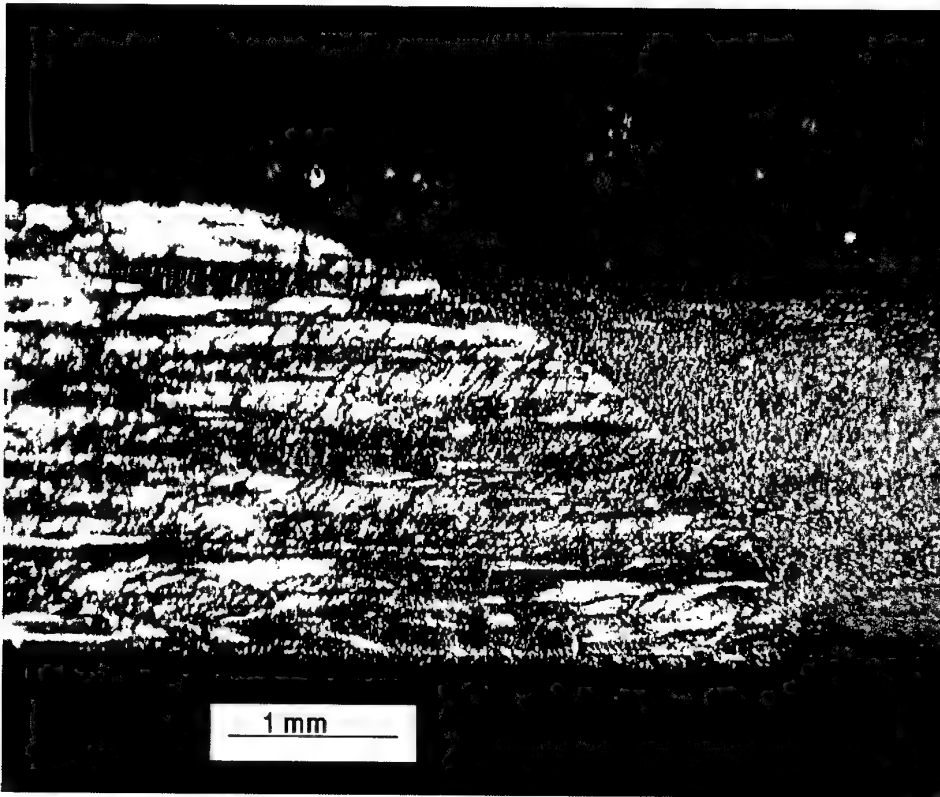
View of the tip of the crack in the thick end of the panel. The fatigue crack surface is the bright faceted region to the left and the deliberately broken surface is the mottled grey area to the right. Note the shape of the crack, much longer along the inside surface of the panel, indicating that a degree of bending was involved in the development of the crack. Also note that the fatigue crack surface is bright and highly detailed, and does not appear to have been rubbing [8].
